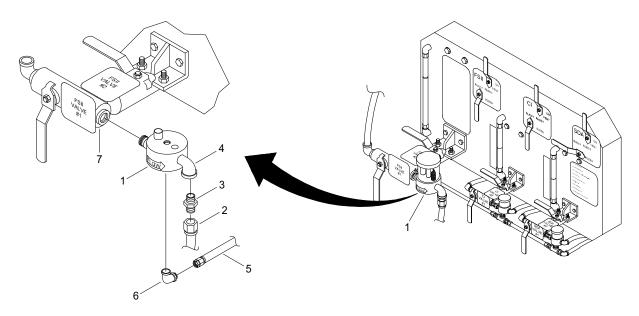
Fuel Additive Injector Assembly HI Volume Sight Flow Indicator (FSII) Removal.
